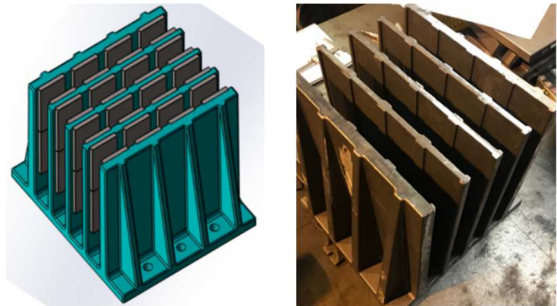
Left: CAD drawing of magnet module with magnets shown in dark grey. Right: Cast magnet module.
